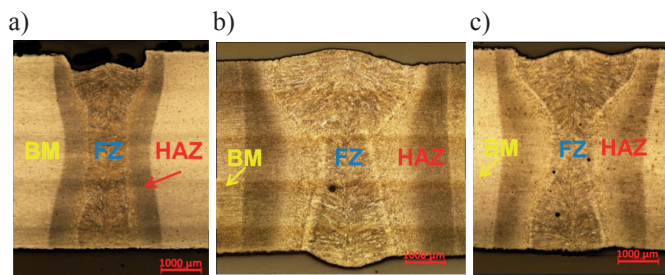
Optical micrographs of the 5.0 mm thick butt joints of S700MC steel produced by autogenous laser welding (Table 4); a) joint A (3.3 kW, 1.5 m/min, heat input 132 J/mm), b) joint B (2.5 kW, 0.5 m/min, heat input 300 J/mm), c) joint C (3.3 kW, 1.0 m/min, heat input 200 J/mm)
